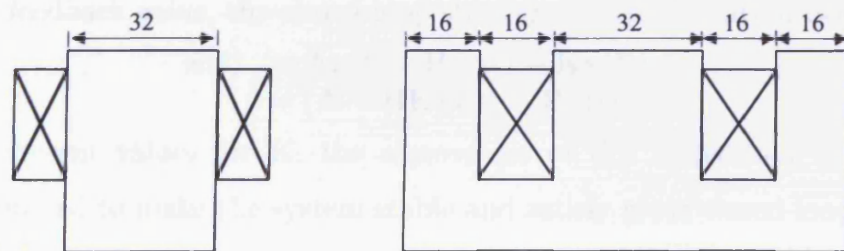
The E-core magnet dimensions [mm]. left: side view; right: front view [1]
